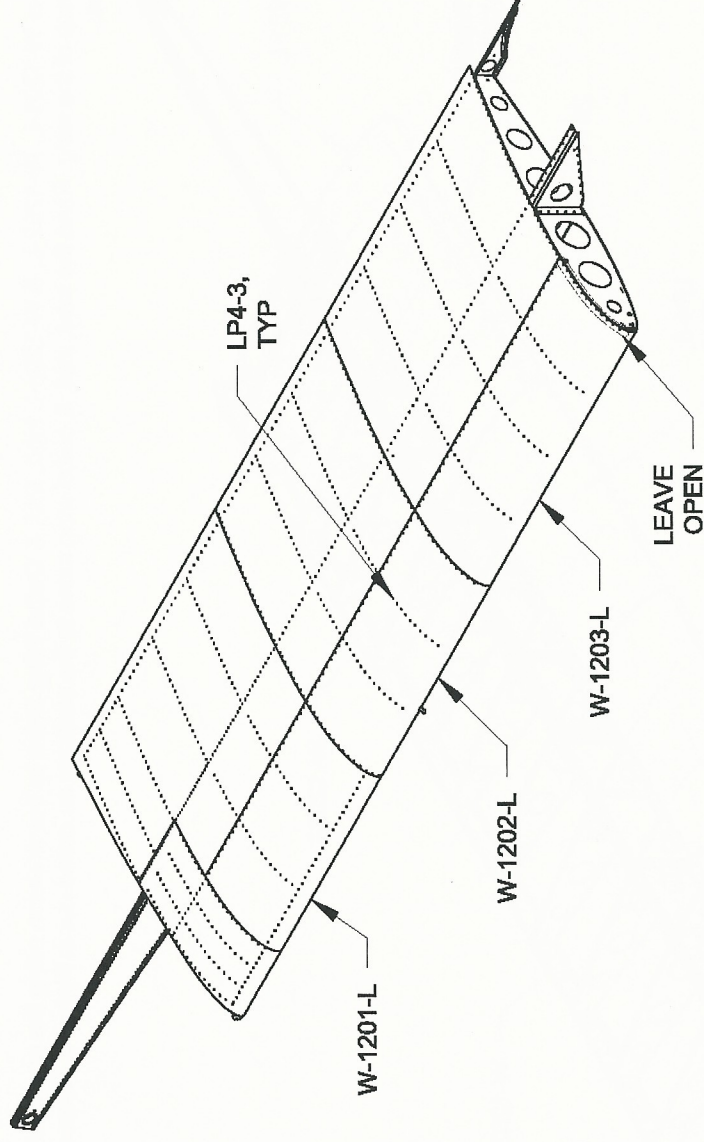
RIVETING MID AND OUTBOARD WING SKINS
